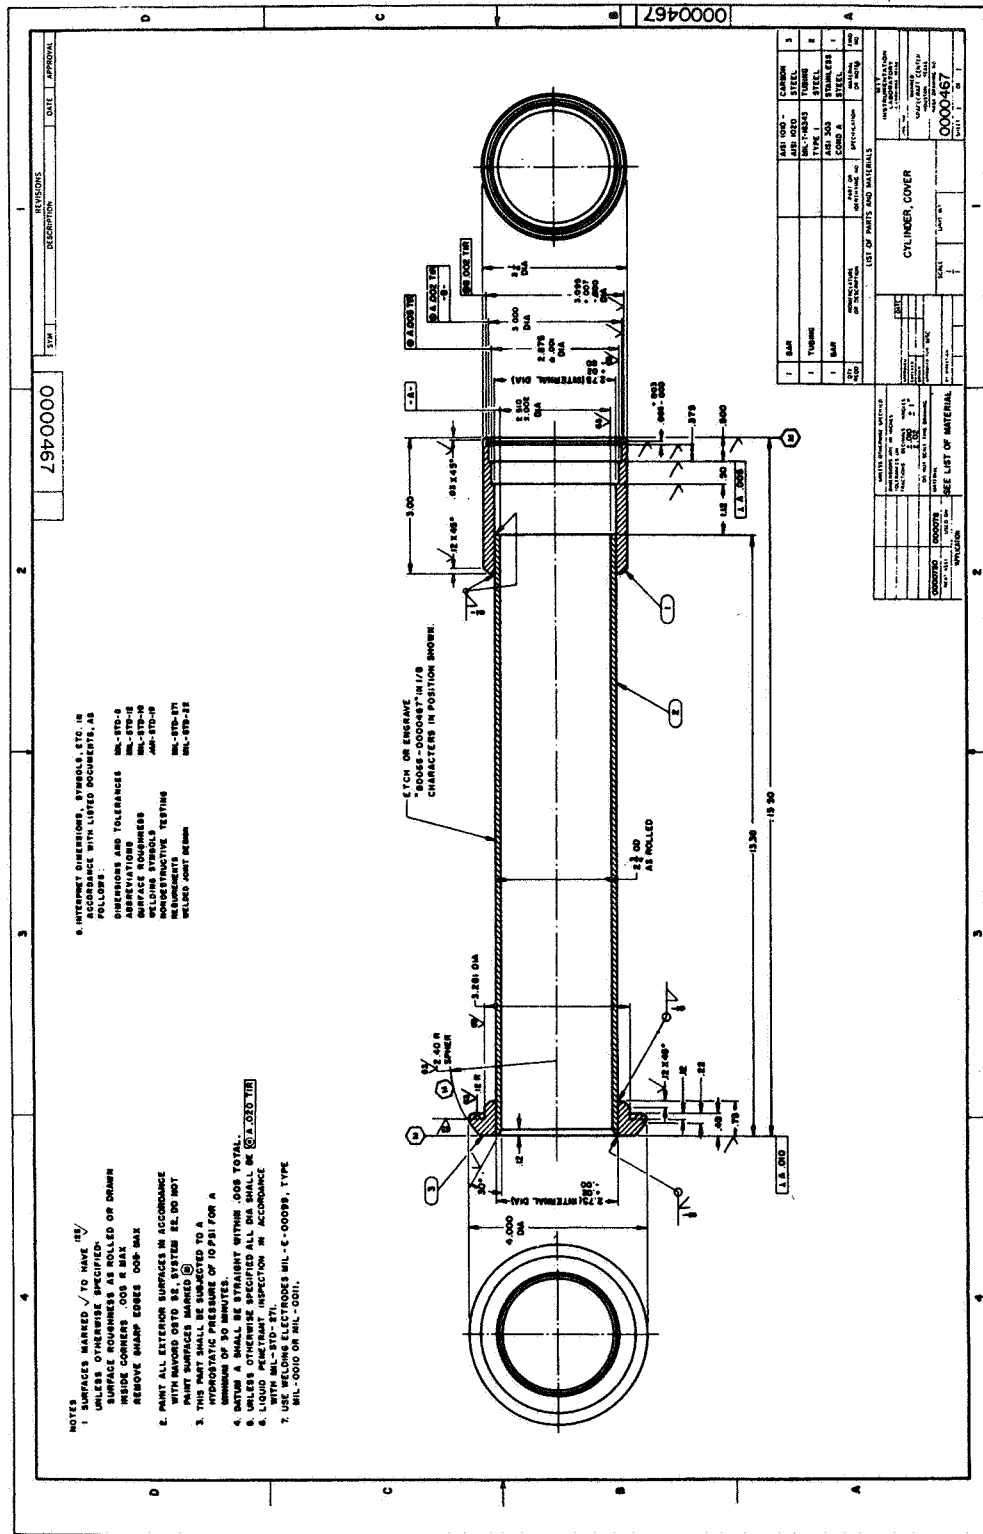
Sample End Product Drawing, Inseparable Assembly.
